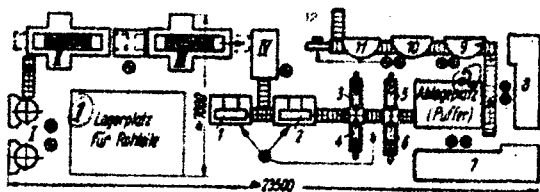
shows the setup of the machine tools for the production of cylinder heads. The mechanical operations are carried out as follows:
